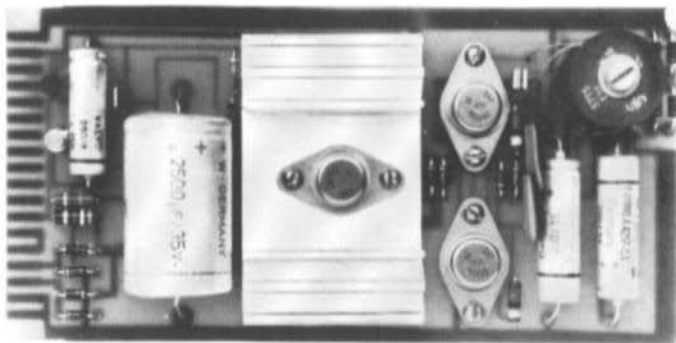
Photograph of the power supply module DJ 9 ZR 008
